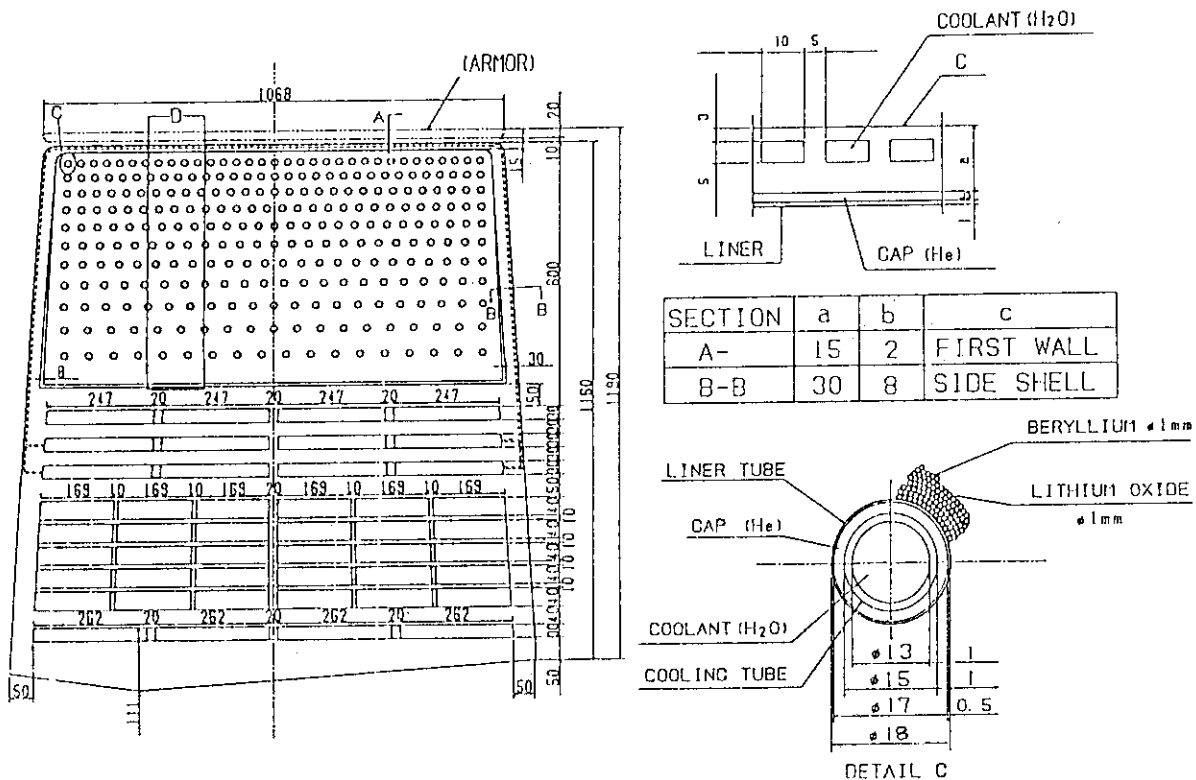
Cross-sectional view of outboard side module at midplane (mixed pebble bed blanket)
